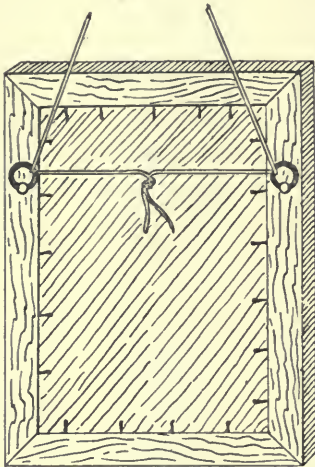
METHOD OF ATTACHING CORD AND RINGS.
